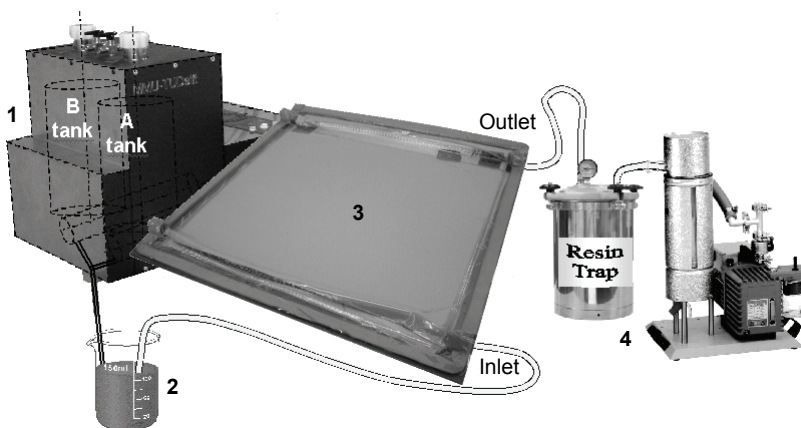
Schematic representation of the processing equipment: (1) mixing/dispensing machine, (2) resin buffer, (3) mould and vacuum bag system, and (4) pressure control system, from [1].
